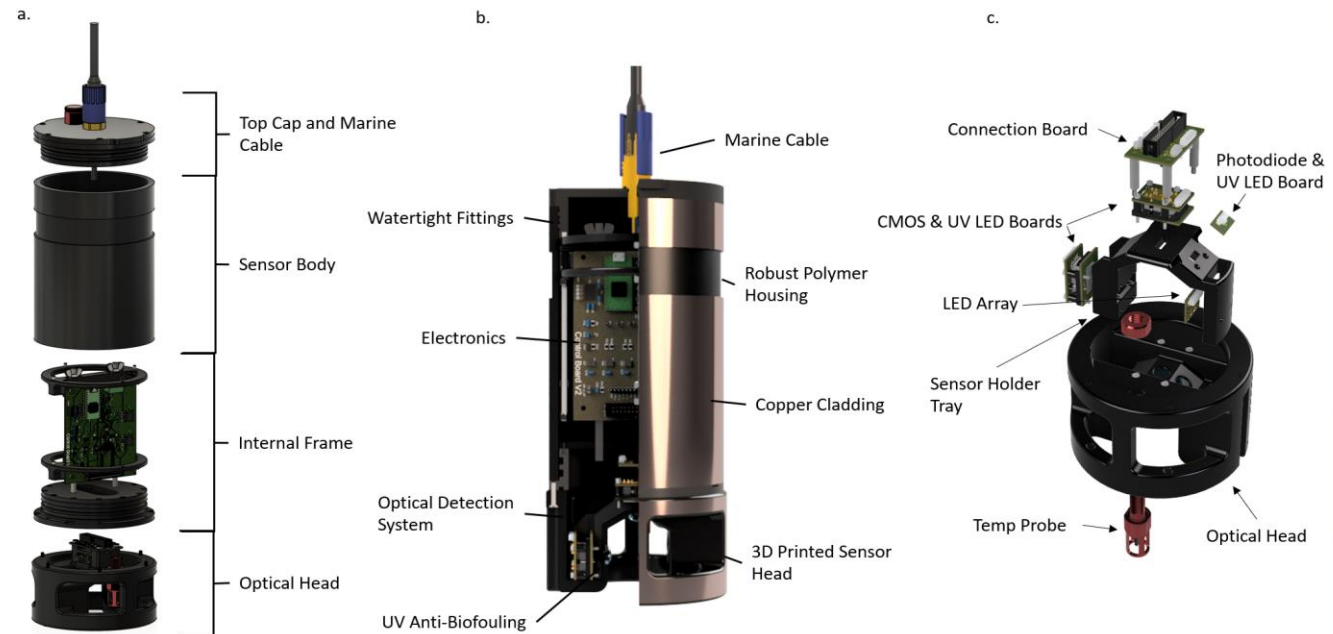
Finalised design of the sensor. A.) Exploded view of sensor sections. B.) Labelled features of the sensor. C.) Exploded view of the internals of the optical head with labelled components
